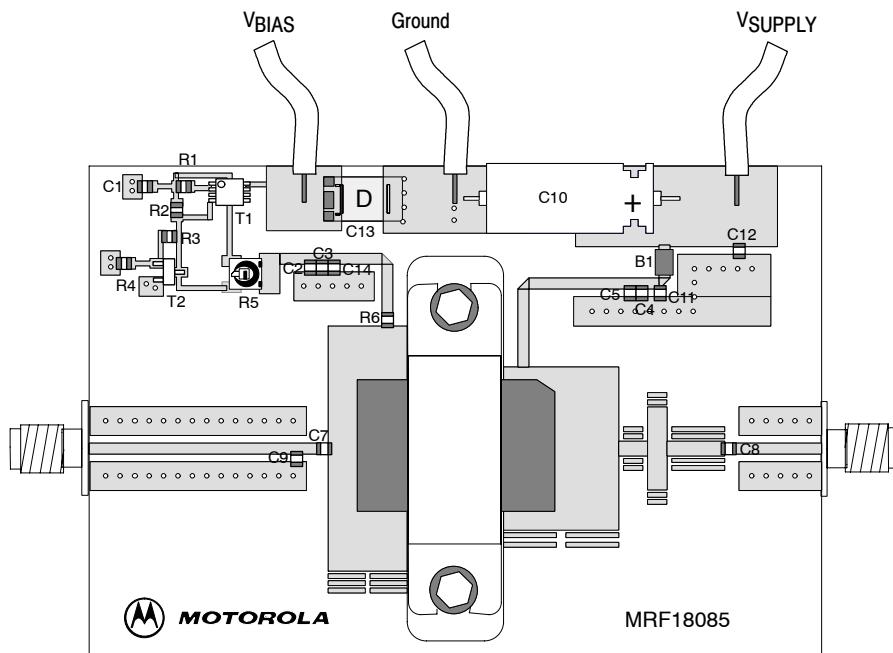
1.93 - 1.99 GHz GSM EDGE Optimized Demo Board Component Layout
